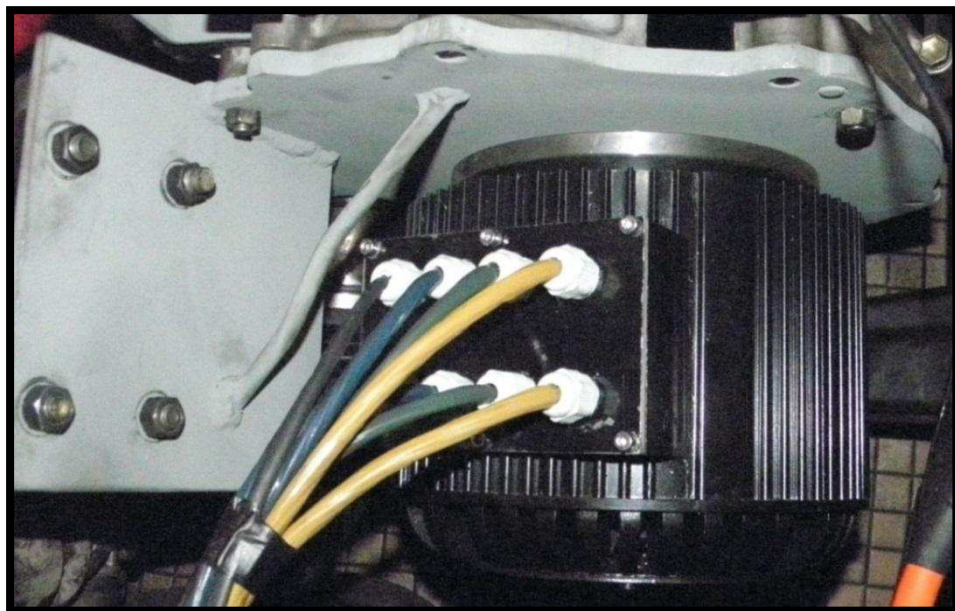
Brushless DC Motor successfully mounted, adaptor plate matches the bolt pattern of the original transmission block. Reinforcement bracket is added to make the mount more stable.
